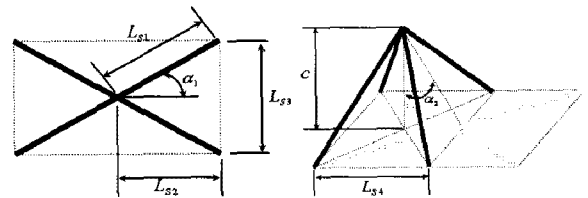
Dimension of expanded metal (left; before crimping, right: after crimping)
